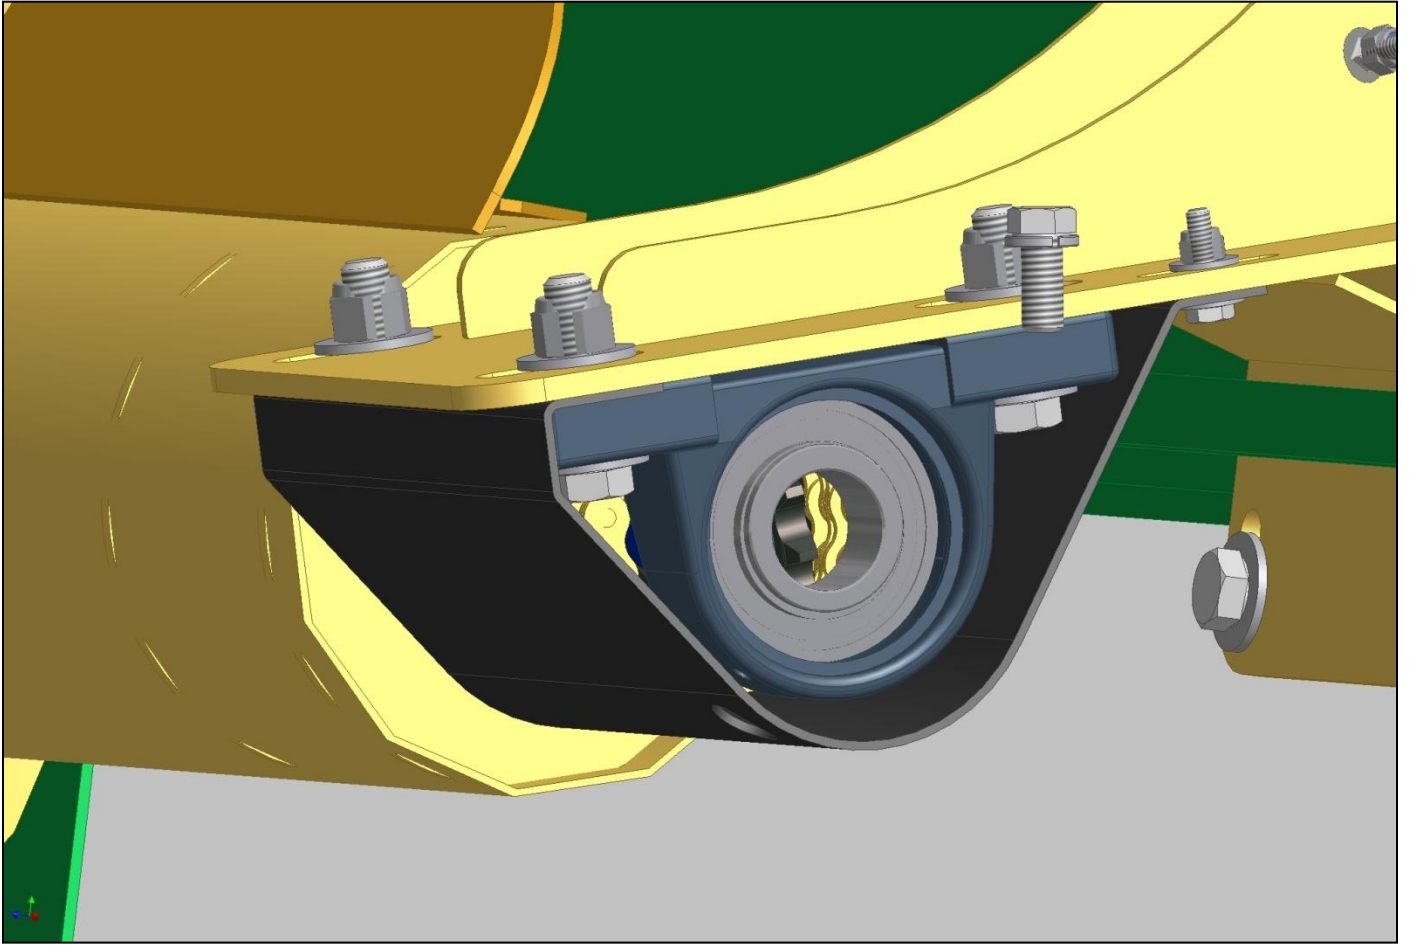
CENTER MOUNT FOR JD9XX SERIES AUGER WITH GUARD COVER ASSEMBLED
